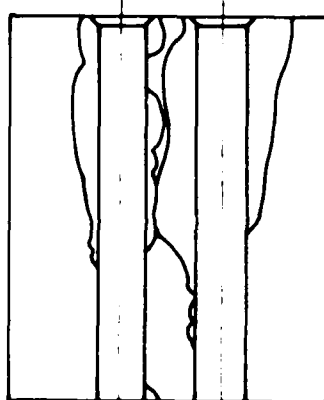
(vii) FRACTURES TYPE (avii) SPECIMENS. COLD-EXPANDED 4 mm, PRESSED-IN
